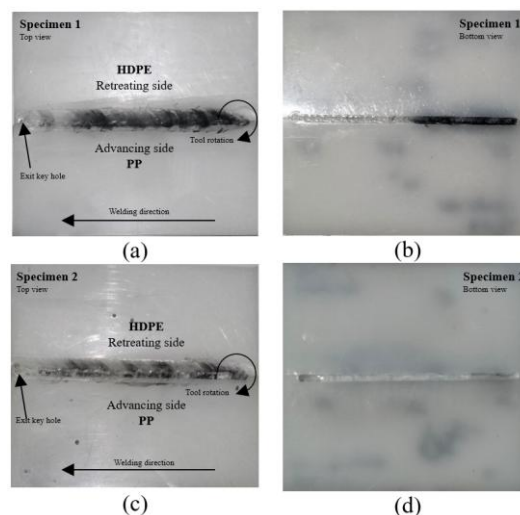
(a) FSW results of plain cylindrical tool specimen 1 top view, (b) FSW results of plain cylindrical tool specimen 1 bottom view, (c) FSW results of plain cylindrical tool specimen 2 top view, (d) FSW results of plain cylindrical tool specimen 2 bottom view
